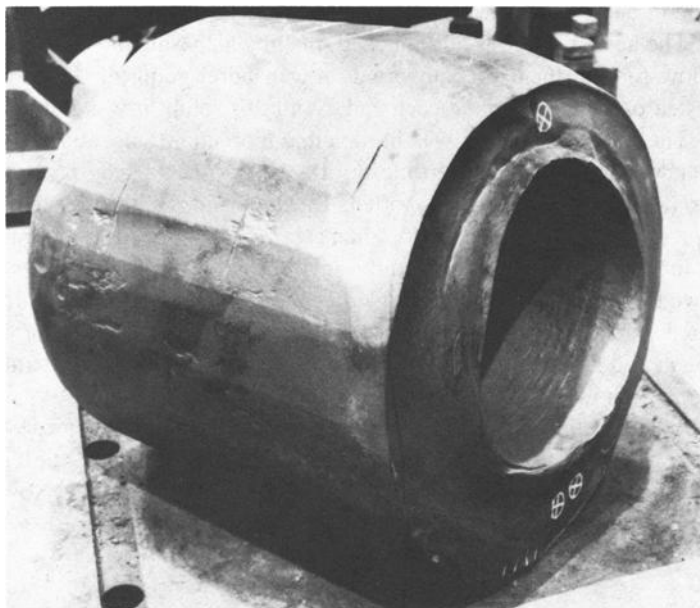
Saddle forging after completing the final heat treatment. Circle on the end shows location of core holes for tension and Charpy-impact tests performed at room temperature.
